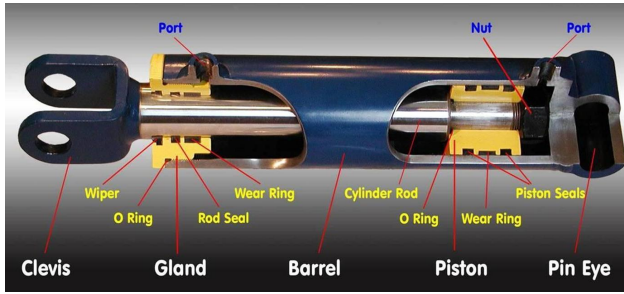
Cut-away view of a welded body, industrial double-acting hydraulic cylinder. Source: Hyco International
